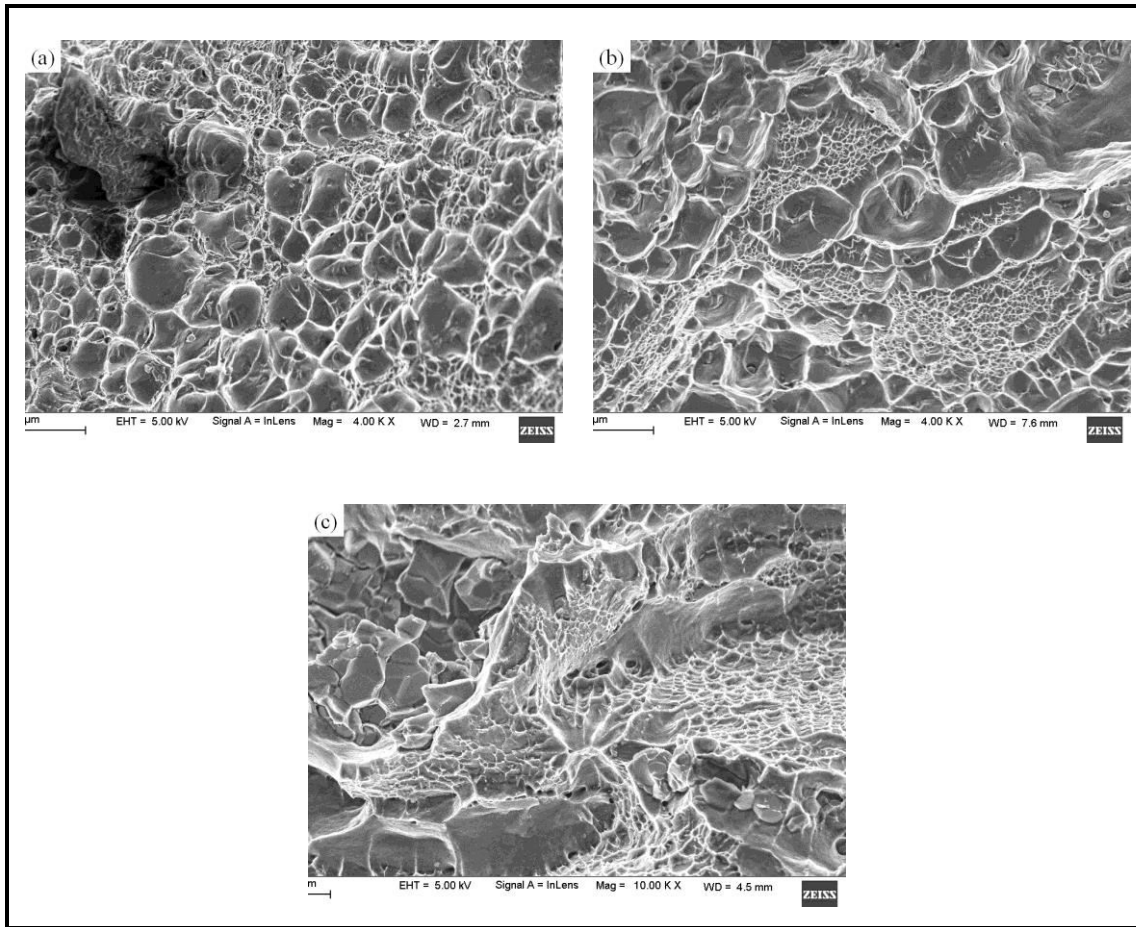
Fractography of tensile test samples; a) T6, b) RRA, c) T7451
